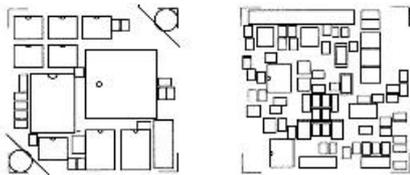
The SLC multi-layer printed circuit board with dimensions of approx. 44x44mm (1.8 by 1.8 inch)
